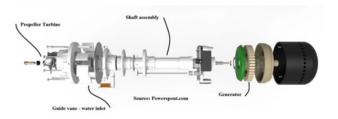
Propeller Turbine Generator (Exploded view)³⁴
